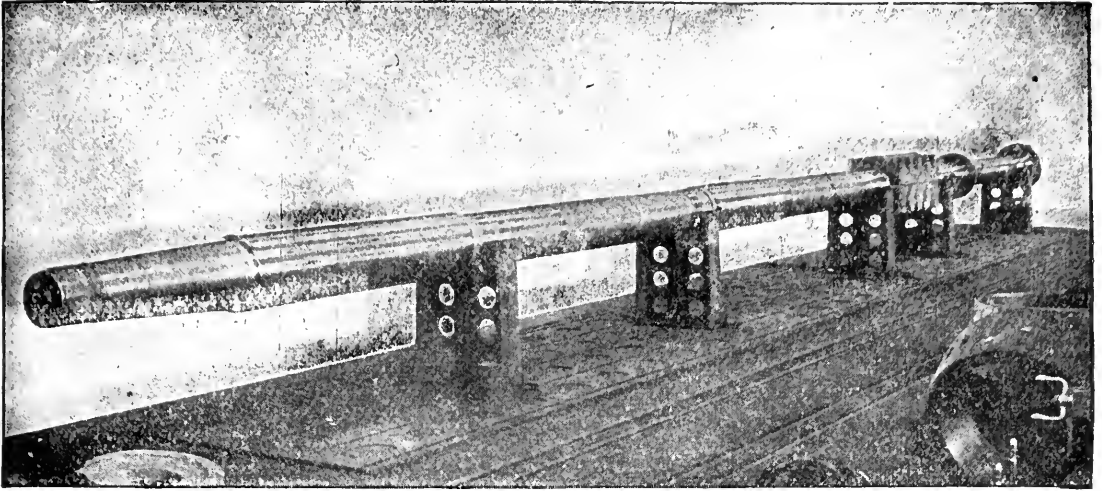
Propeller Shaft for Steamers "St. Louis" and "St. Paul," of the International Steamship Co. Length, 53 ft. 5 in.; outside diameter, 21 in.; inside diameter, 6 in.; hole plugged.
